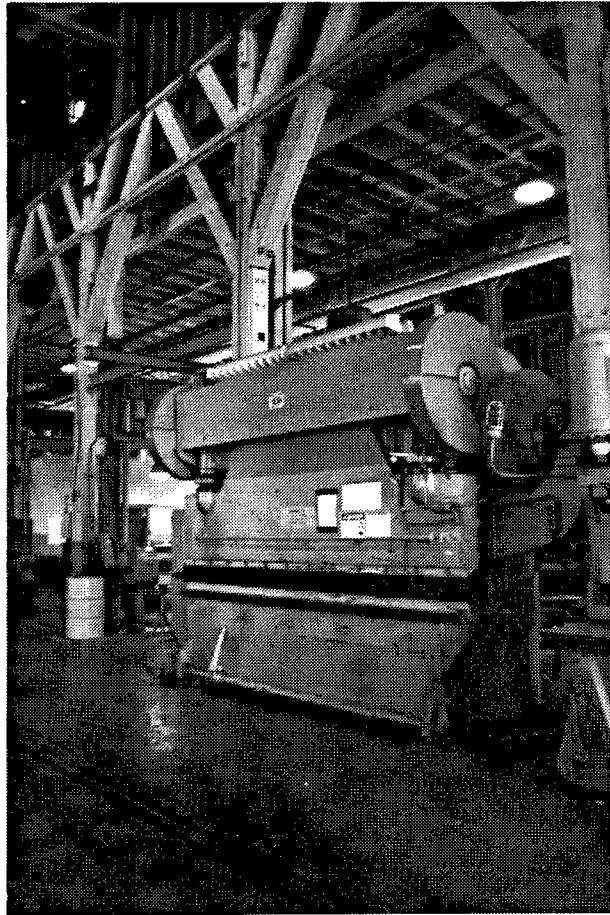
Building 100: Power Brake (serial #0287) manufactured by Dreis & Krump Mfg. Co., Chicago, IL. Tool forms and shapes metal.
